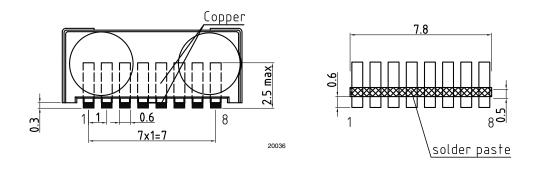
Recommended Footprint for Top View Applications and Solderpaste Mask
